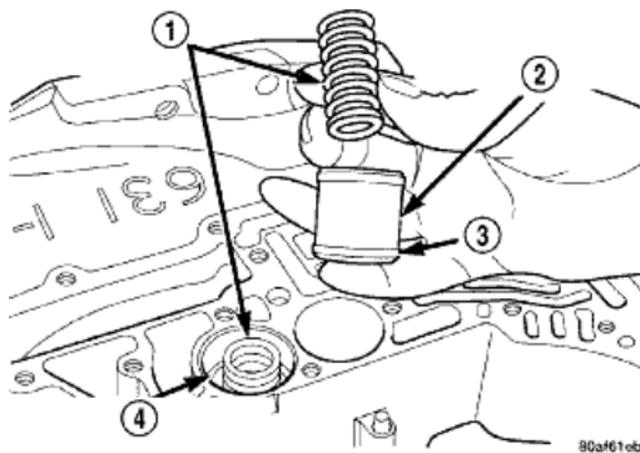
Removing/Installing Underdrive & Overdrive Accumulators
